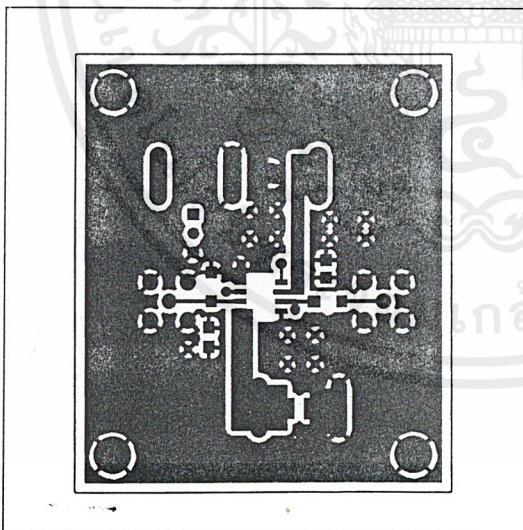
MAX477 EV Kit PC Board Layout—Component Side
